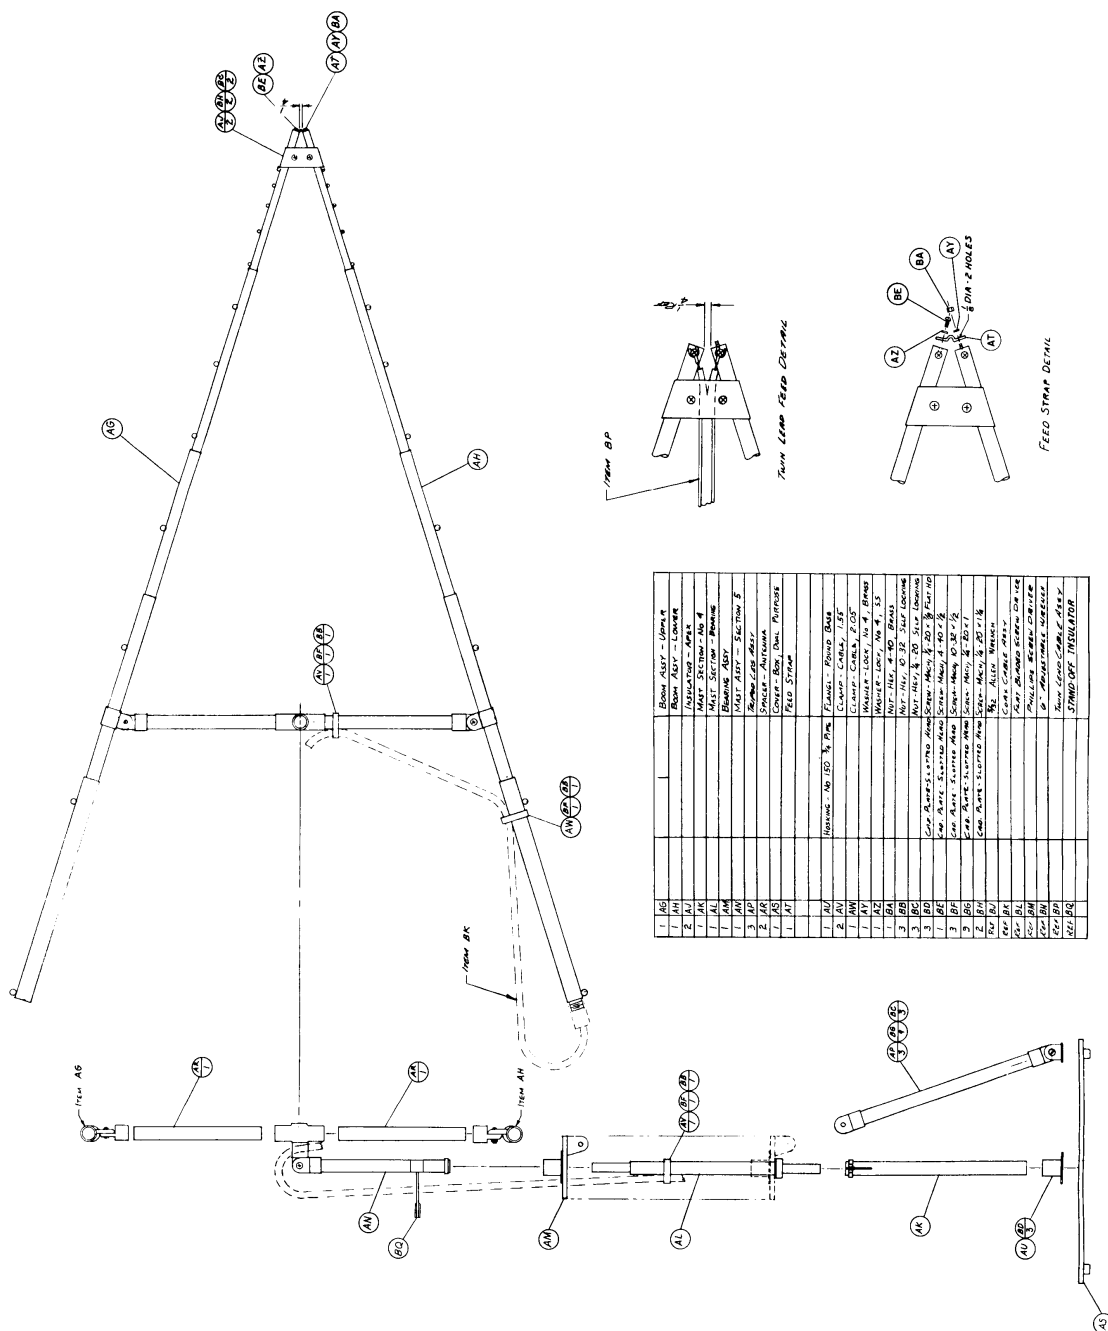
Expanded View of Indoor Installation Showing Assembly Procedure
